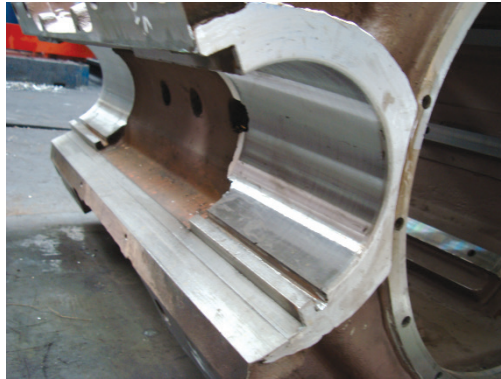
Half-sleeve of a slide bearing – element of motor body
